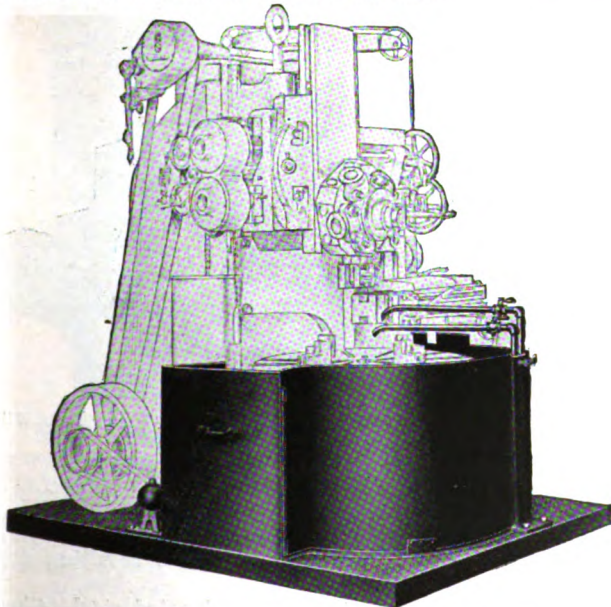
A CUTTING LUBRICANT SYSTEM FOR THE VERTICAL TURRET LATHE AND MAXI-MILL. This consists of a steel pan, floor plates, steel guards, a centrifugal pump and adjustable lubricant conductors. This unit having a capacity for a large supply of cutting lubricant permits the use of maximum feeds and speeds. It keeps the cutting solution out of the machine and off the floor in addition to providing ample capacity for chip storage.
